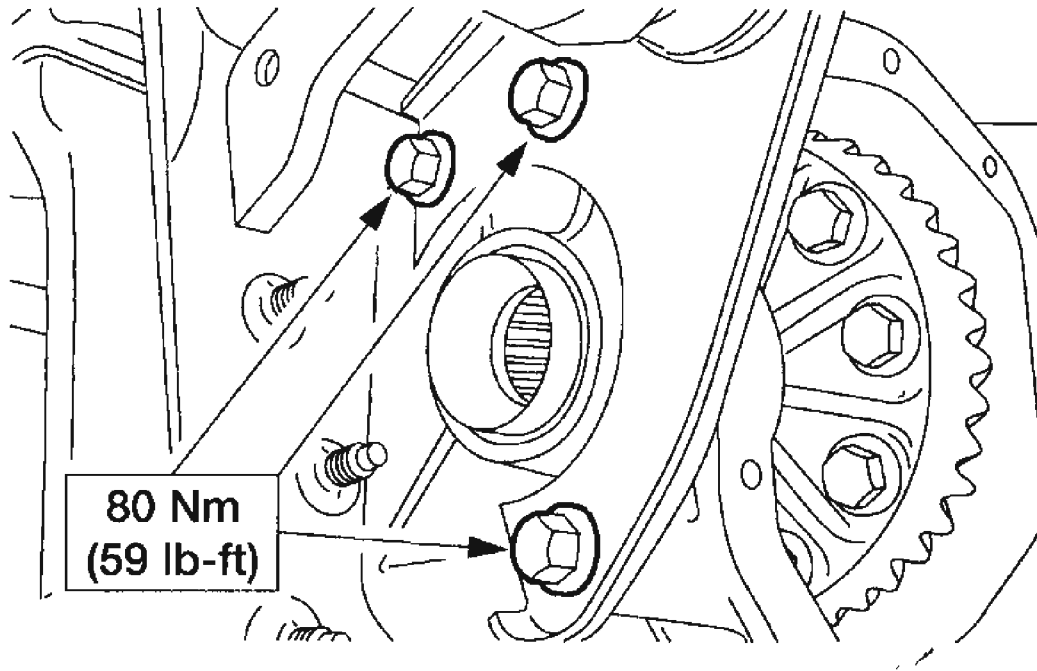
Removing Differential Housing-To-Front Insulator Bracket Bolts
